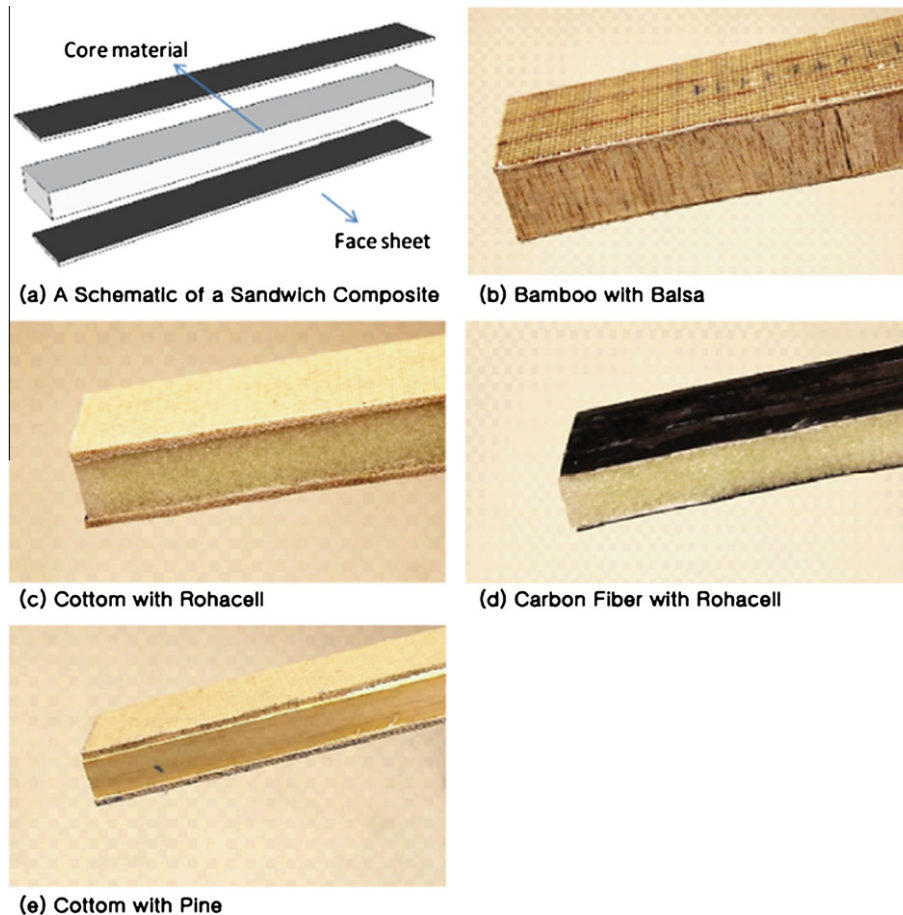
(a) A schematic of a sandwich composite. (b) Bamboo face sheet with Balsa wood core sandwich beam. (c) Cotton face sheet with Rohacell foam core sandwich beam. (d) Carbon fiber face sheet with Rohacell foam core sandwich beam. (e) Cotton face sheet with Pine wood core sandwich beam.
